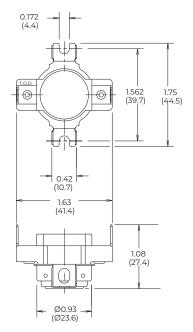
Surface Mounting (enclosed) Dimensions are shown in inches and (millimeters). Automatic Reset SPDT – This design is the same as the SPST described above with the addition of an auxiliary contact which makes circuit upon the opening of the main contacts and breaks circuit when the main contacts reset. Refer to the "General Electrical Ratings" chart for rating limitations on the auxiliary contacts. Typical uses of this construction include fan speed changeover at a specified temperature and lighting of an indicator lamp when an abnormal temperature condition has been reached (see figure 3).
